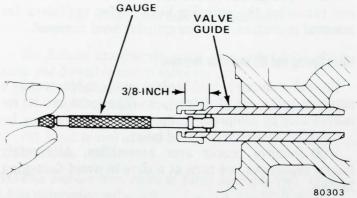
B-131 Measuring Valve Guide with Telescoping Gauge
